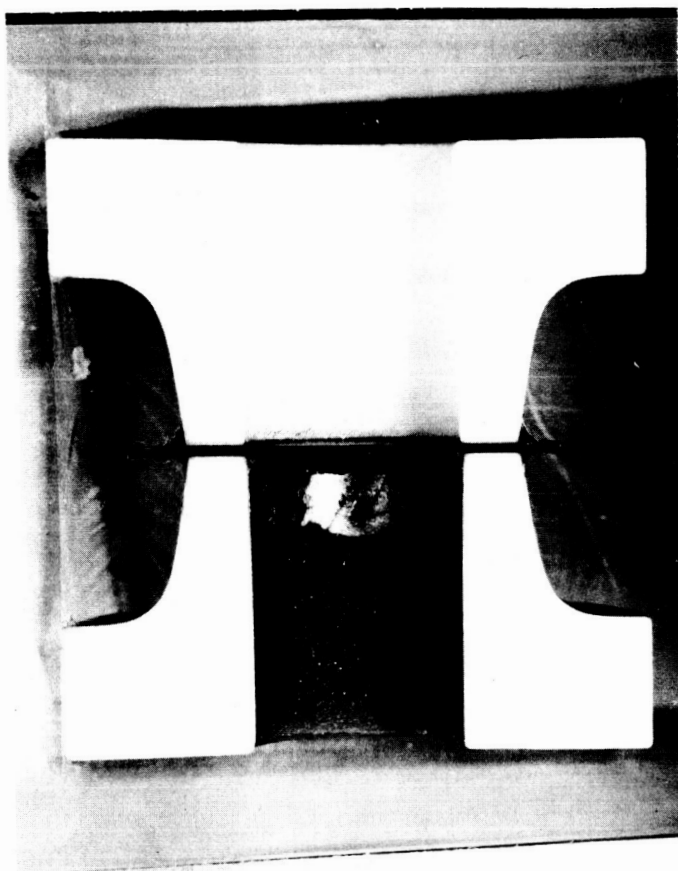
Section Through a CLM-15 Test Sample With a Cb-Zr-Be Active Metal Braze Between AD-99 Ceramic and Cb-1Zr. The bottom sample was evaporation metalized. Superior wetting of this sample is indicated by the smooth inside fillets of braze metal not present on the upper unmetallized ceramic joint. (2X)
